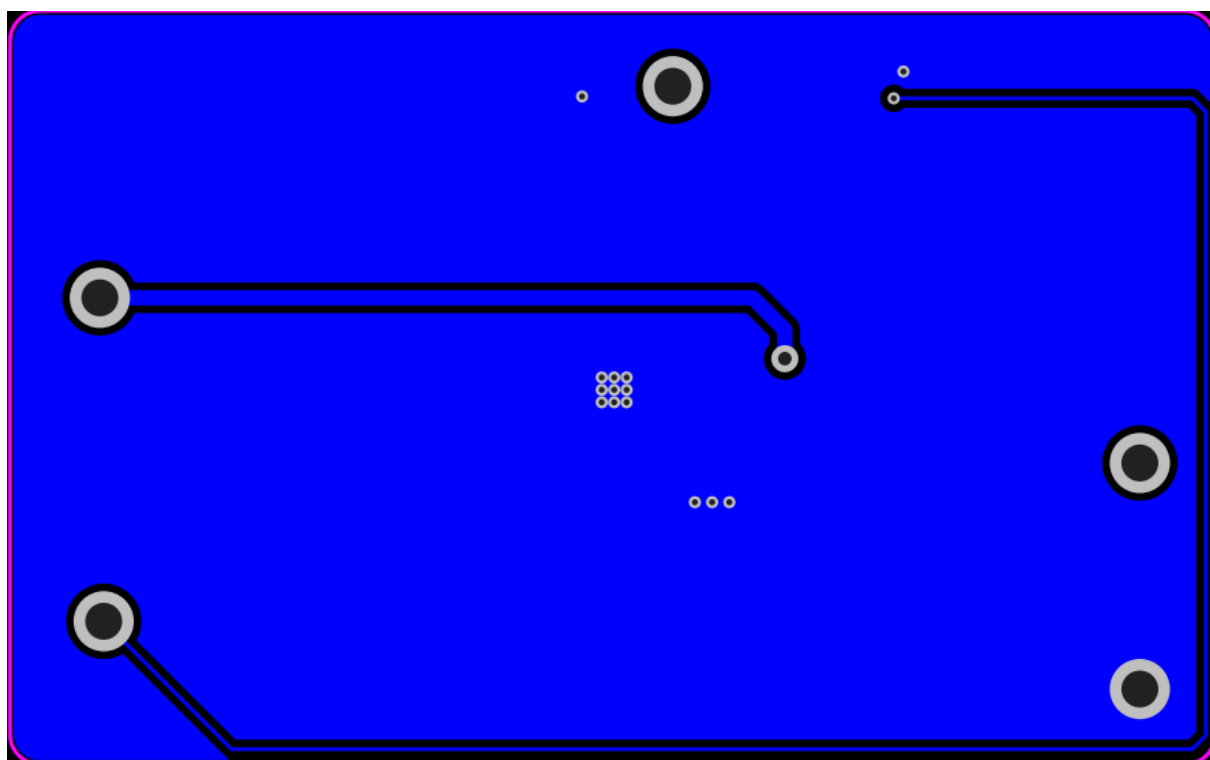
PCB Layout Plots: Bottom Layer Routing (ESOP8)
